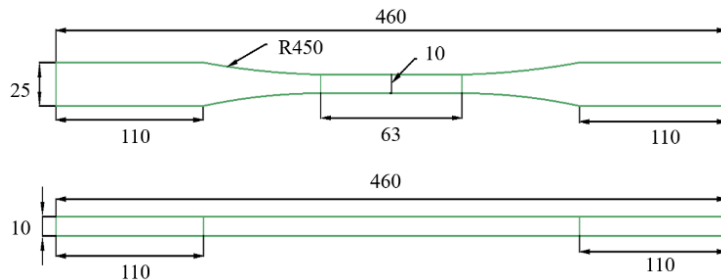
Dimensions of bamboo scrimber tension specimens (units: mm).
